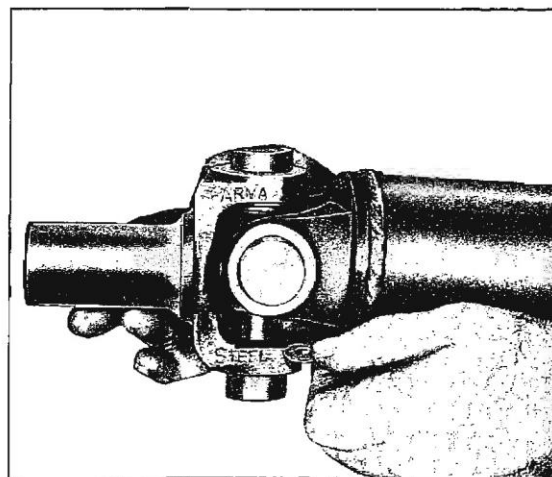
A-5 Placing Washers Inside Bearing of Splined Yoke Member
